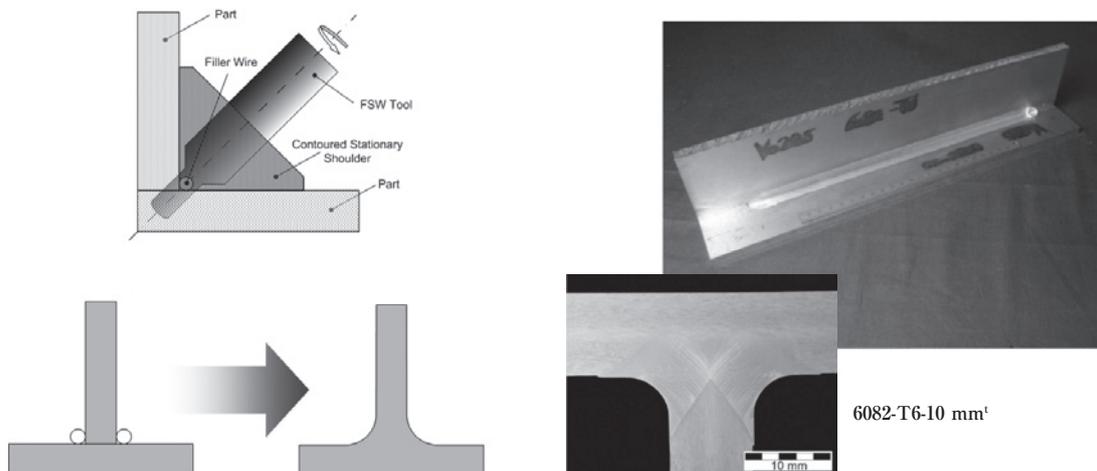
Stationary shoulder fillet FSW with a filler metal.
